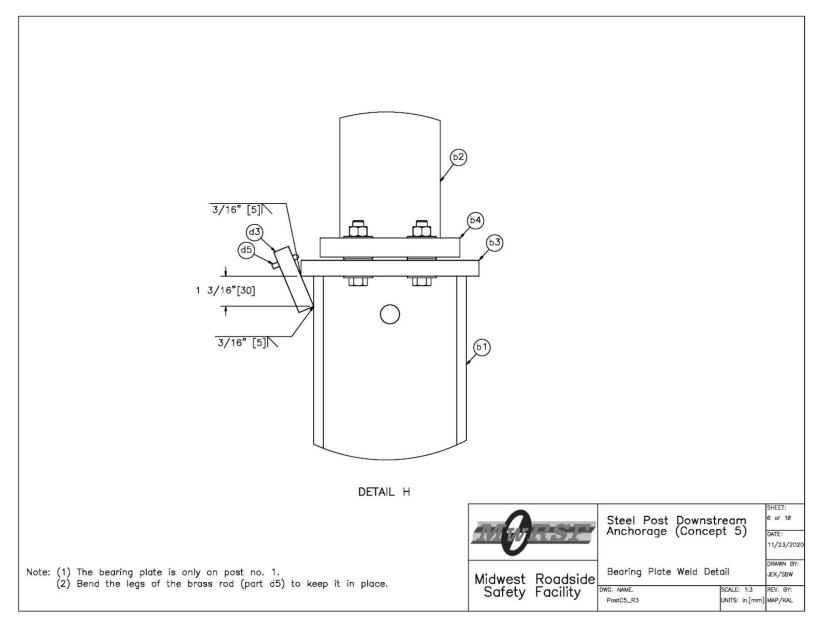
Bearing Plate Weld Detail, Test No. SPDA-5
